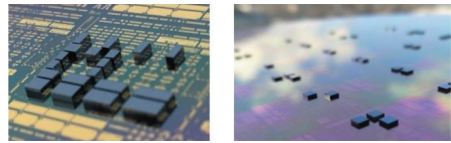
3D assembled demonstrators: (a) copper pillar assemblies; (b) direct hybrid bonding assemblies.
